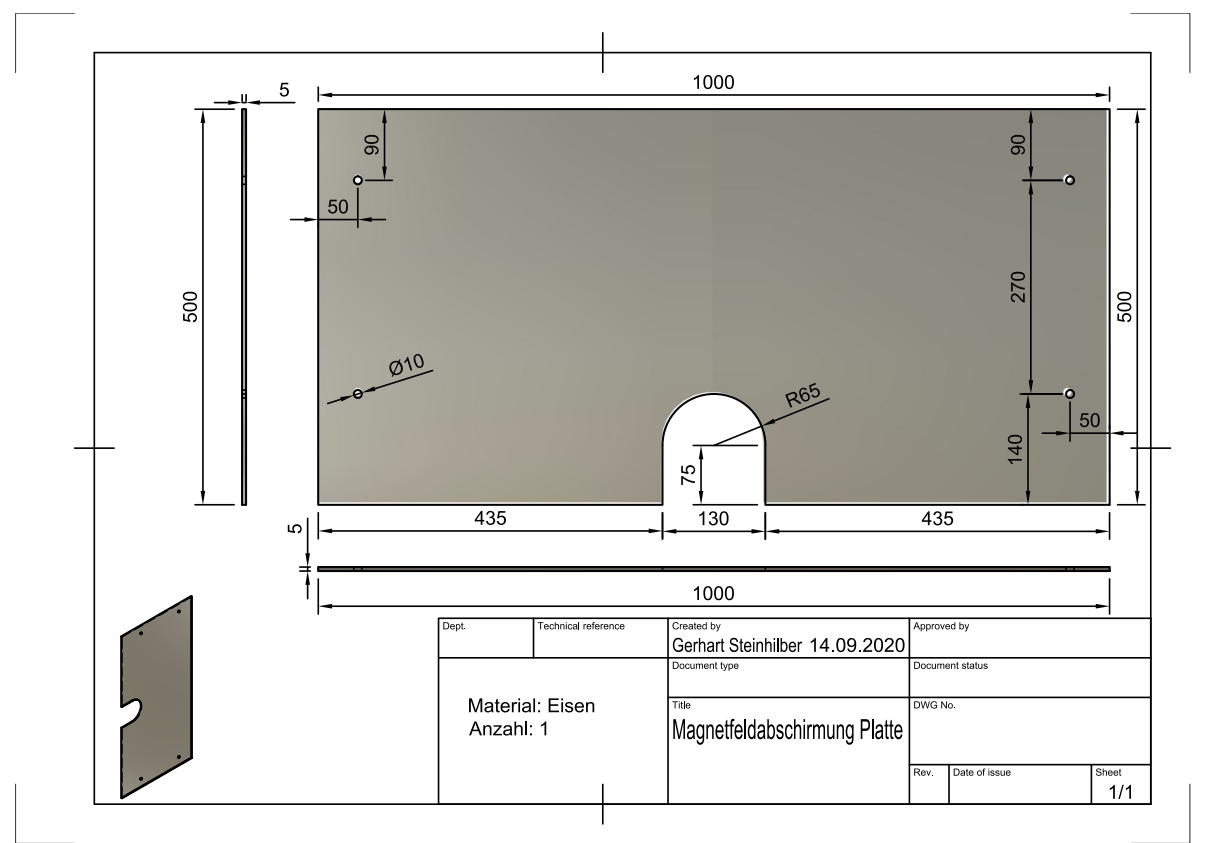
Technical drawing of the magnetic field shielding, which is attached to the side of the tower.
